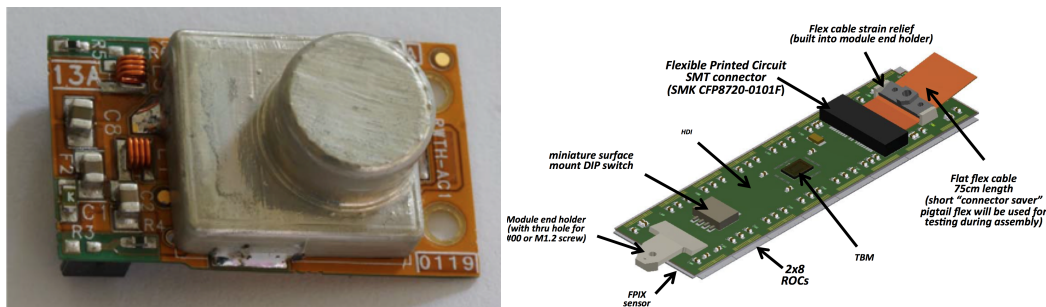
A DC-DC converter with the FEAST2 chip (left), and the CAD drawing of a FPIX phase1 module (right).
